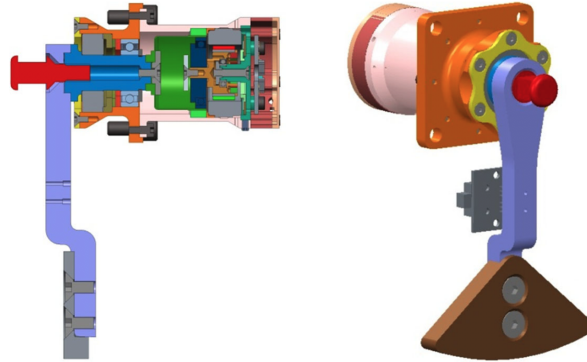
CAD sectional drawing of the MASCOT's mobility unit.
